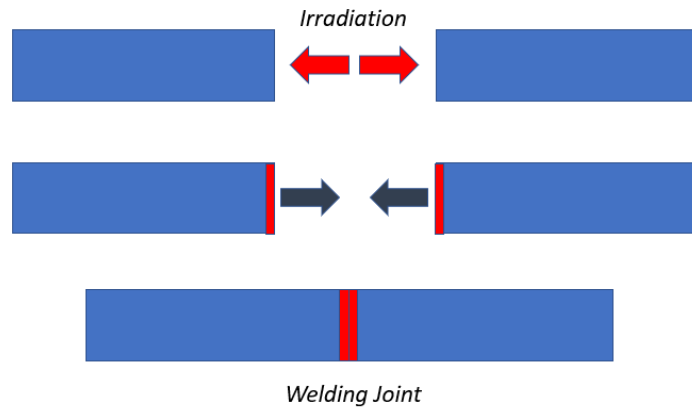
Butt welding phases: 1) Irradiation of the two components, 2) Heating and pressing, 3) Cooling of the heated part.
